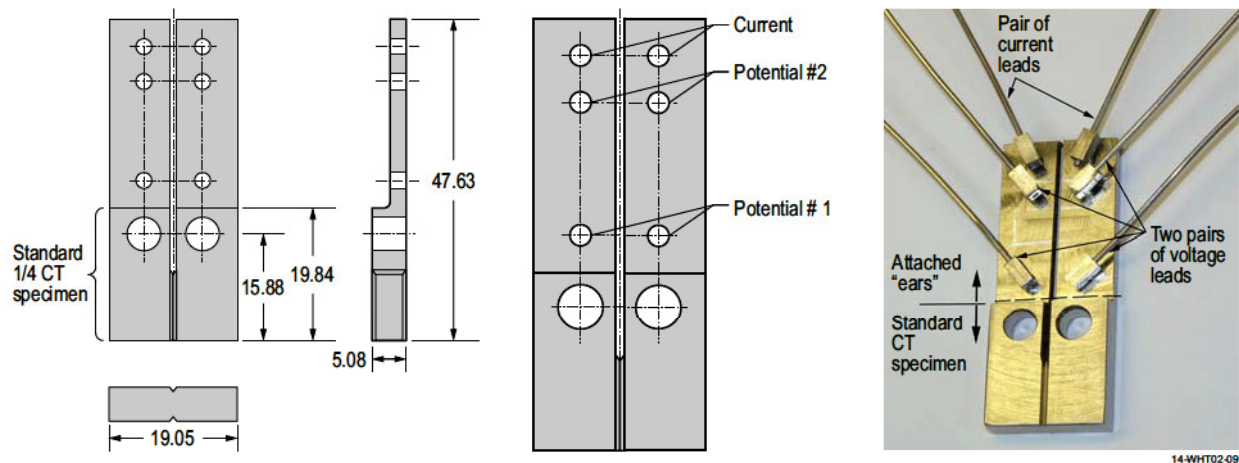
Specimen geometry and with leads dry fit attachments.
